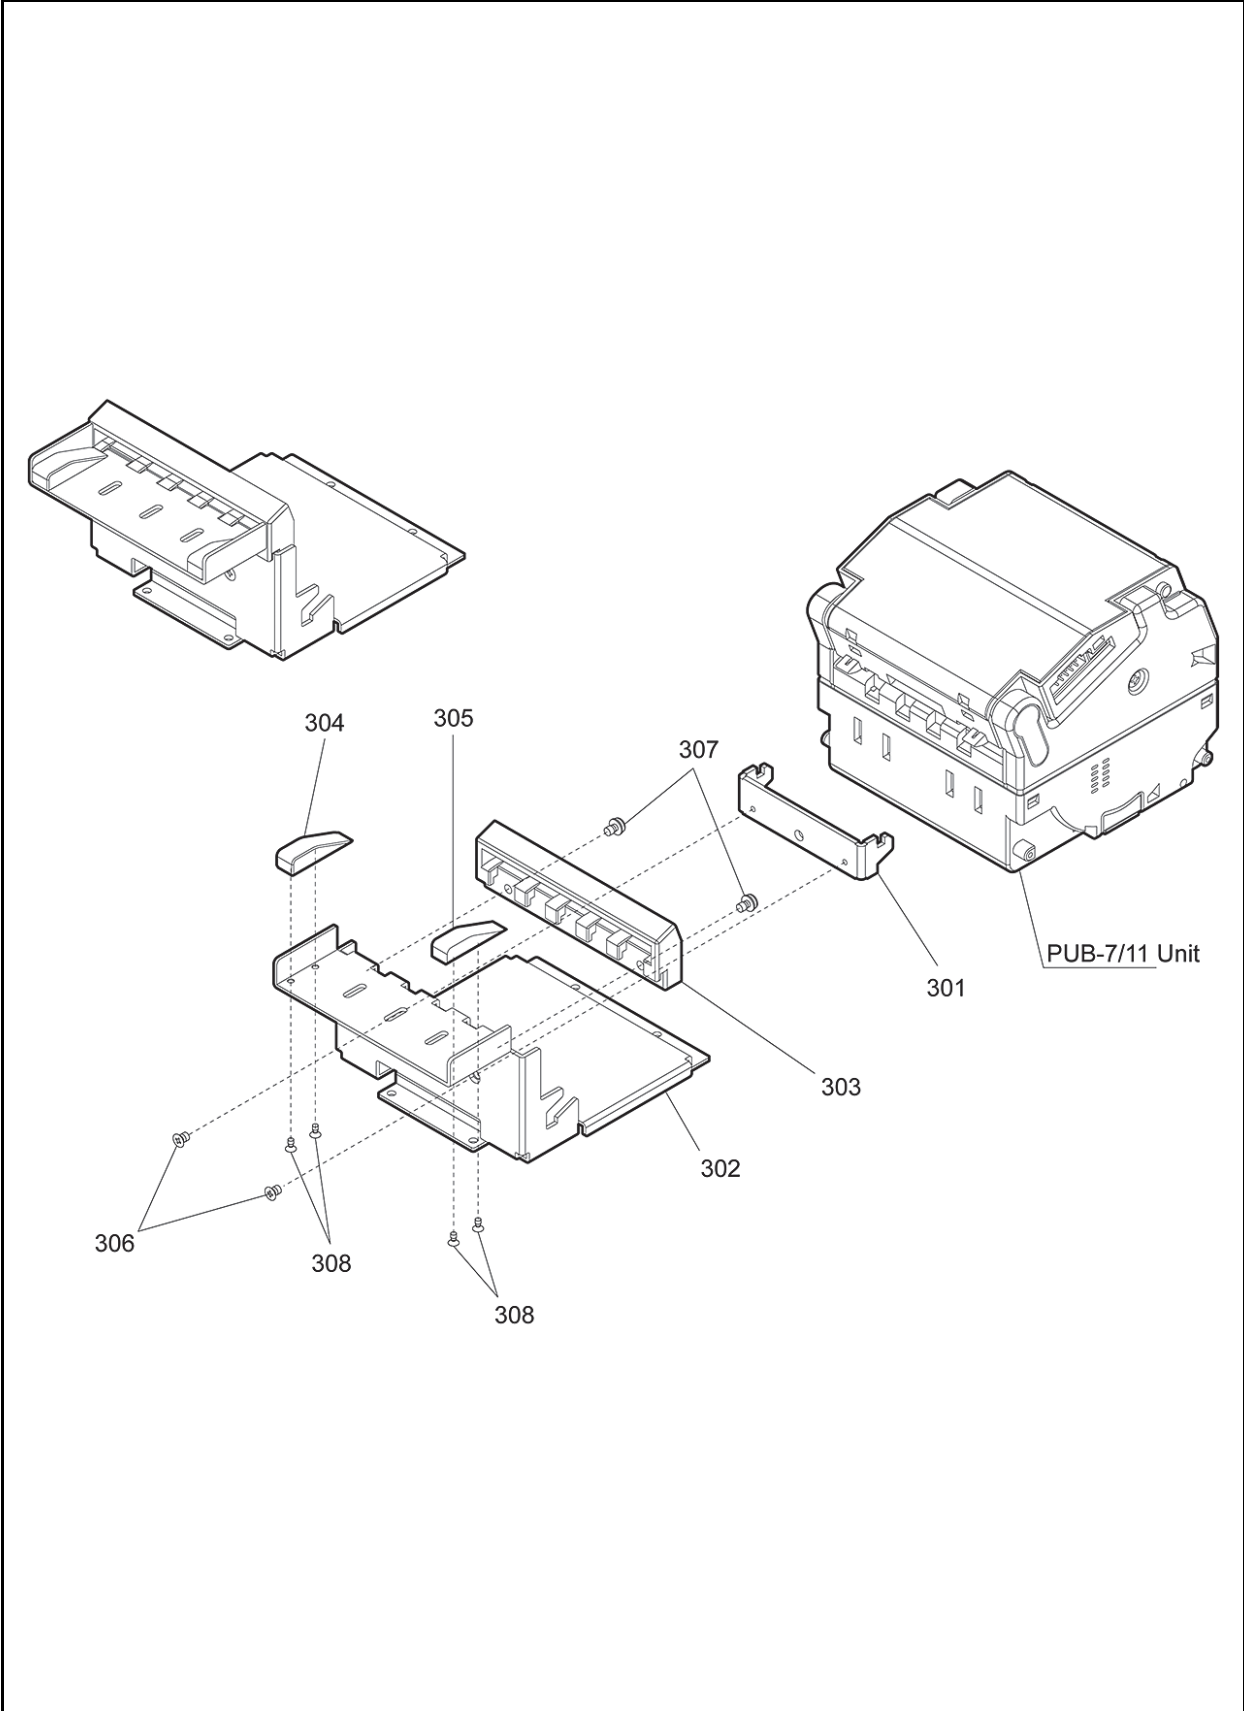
Taiko EBA Type Bezel Unit Exploded View
